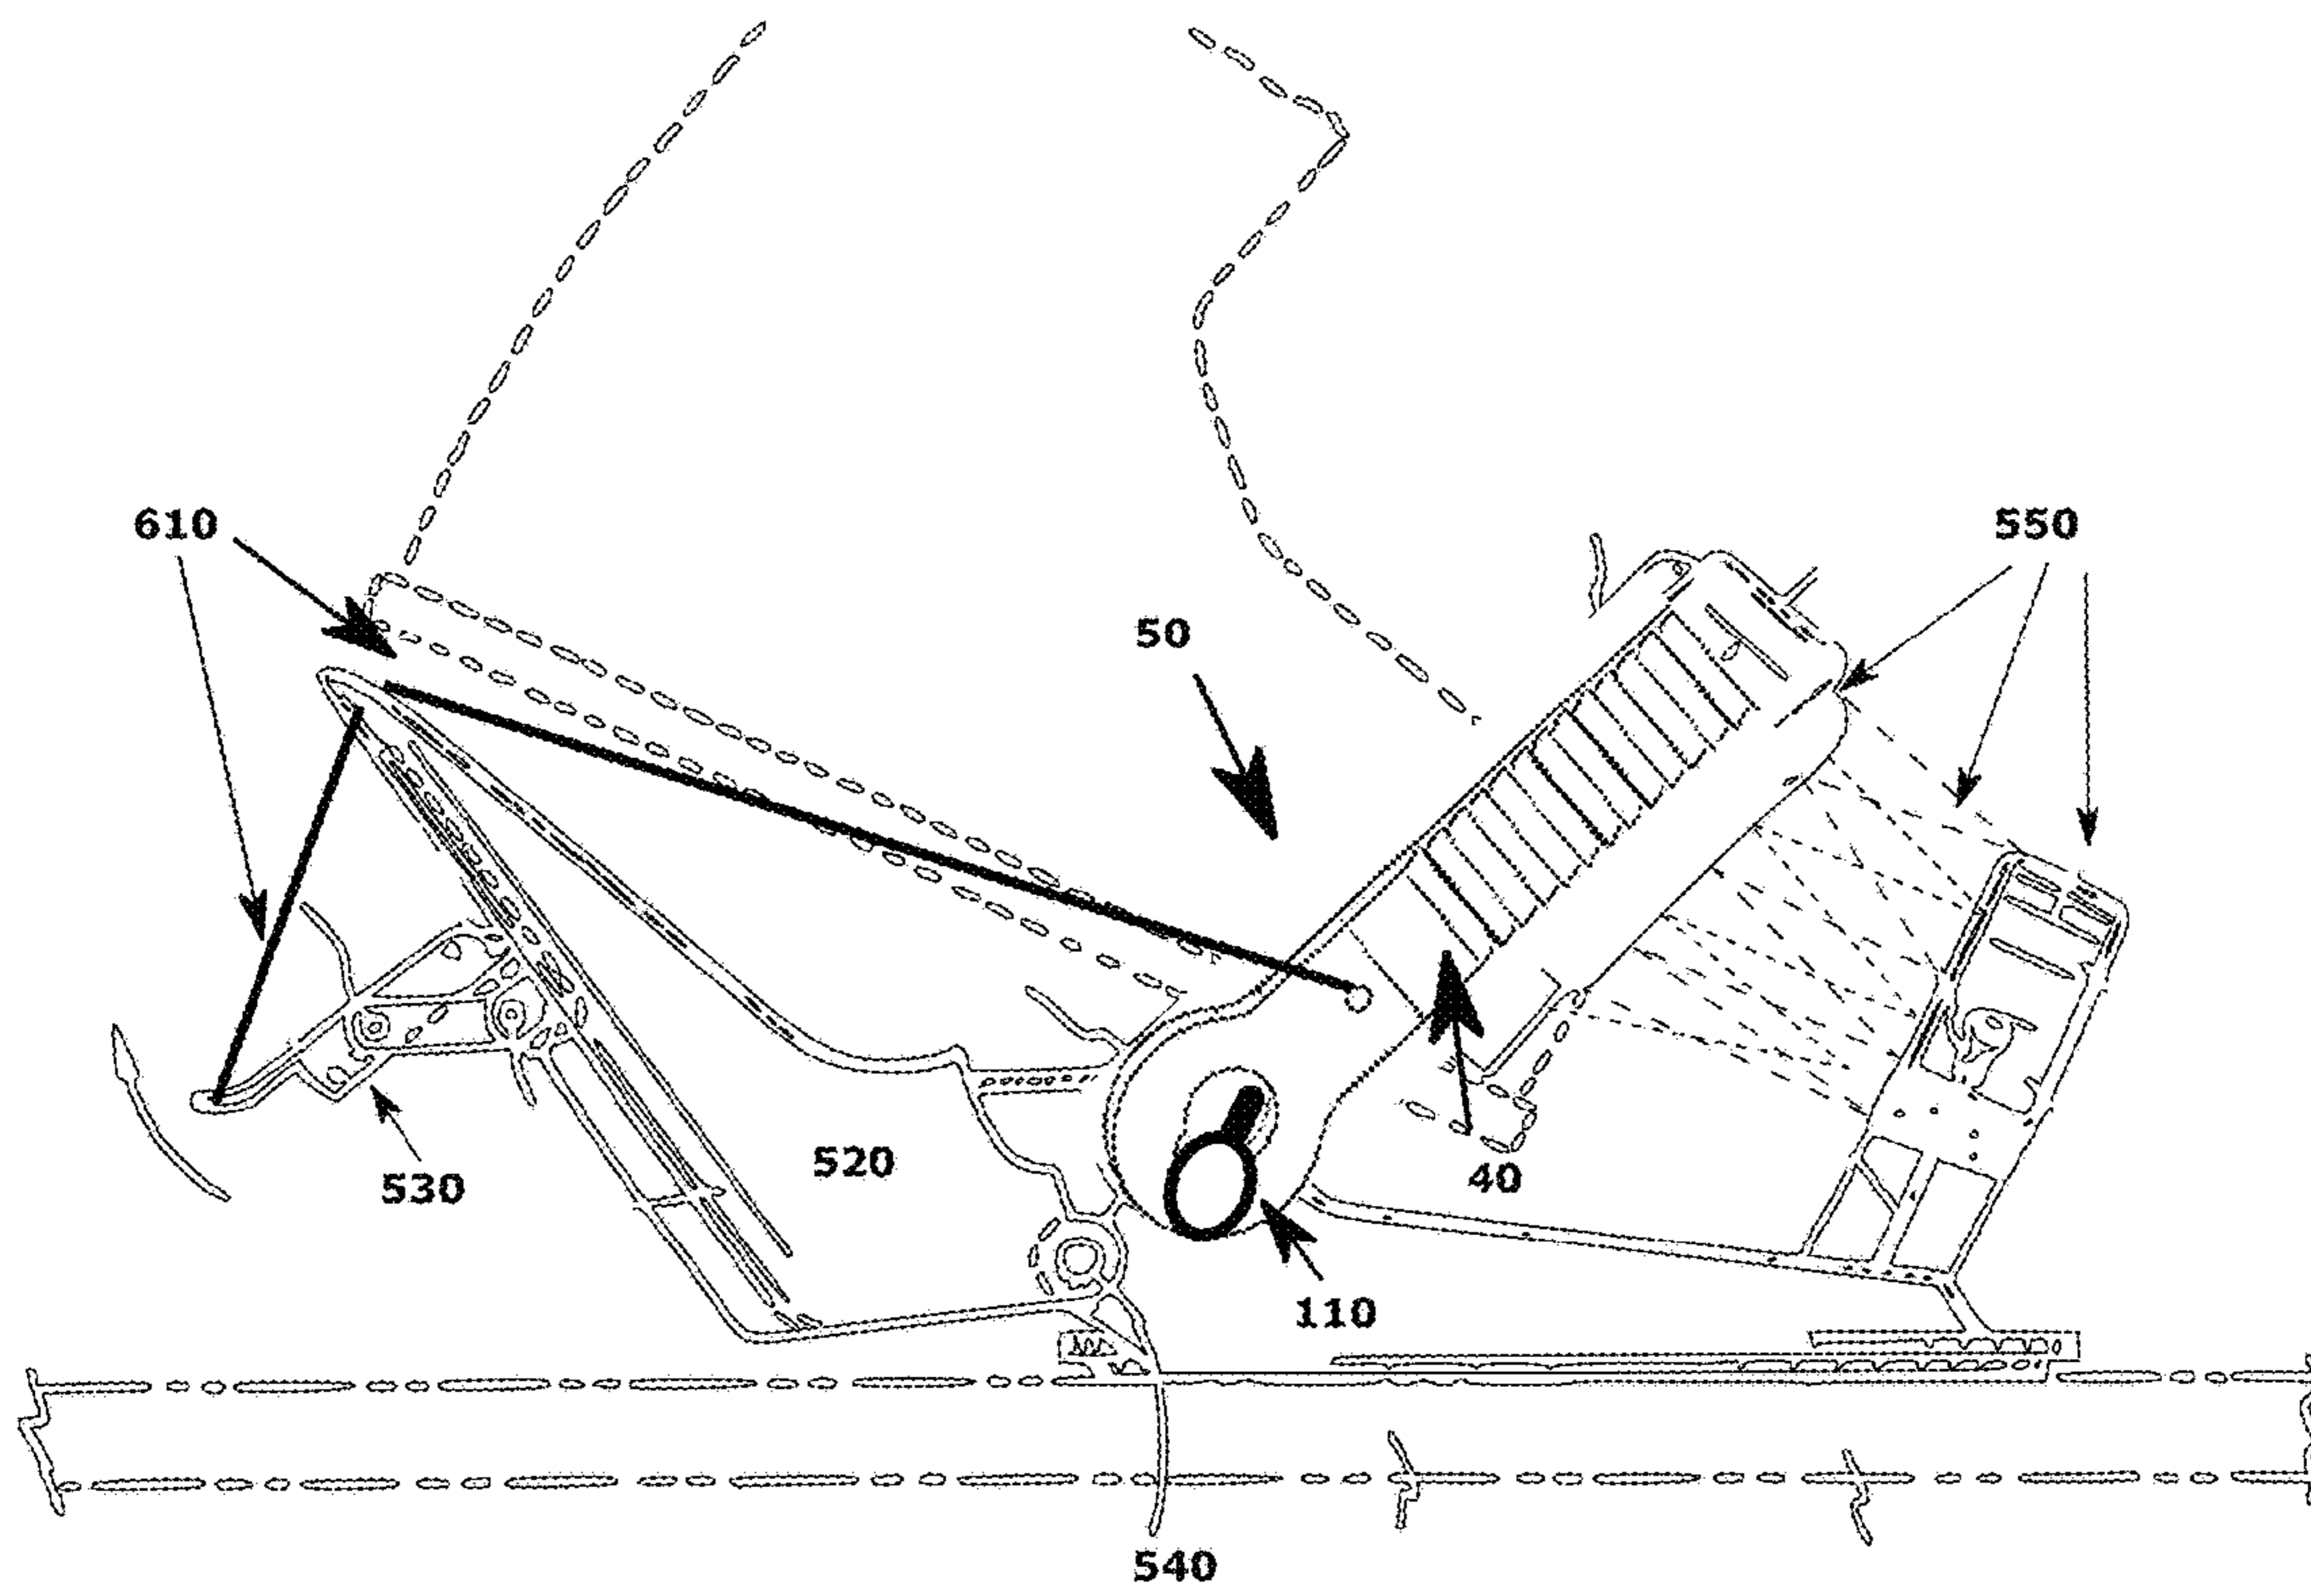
Drawing of an embodiment of one-handed strap for use in a hybrid binding design.
